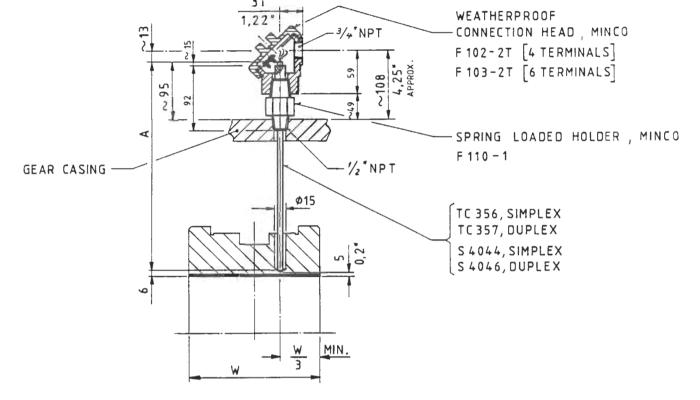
Technical details of instruments for radial bearings mounted from outside of the casing
